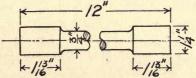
TORSION SPECIMEN FOR CAST ZINC.
